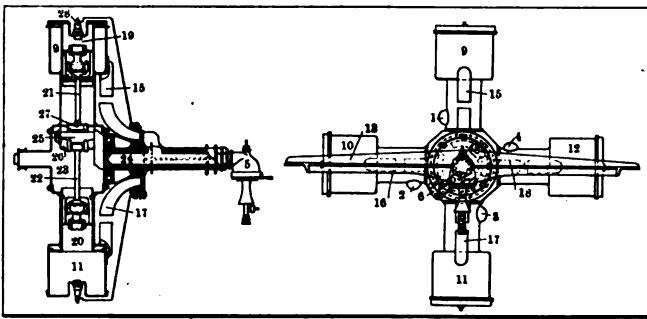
Sectional views of the Palous & Beuse revolving cylinder two-cycle motor
